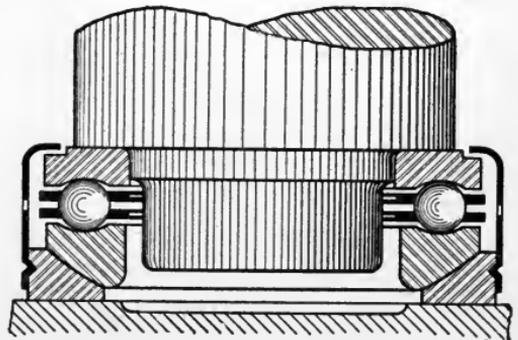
Hess-Bright Thrust Bearing with a Lining Washer and Enclosing Case
